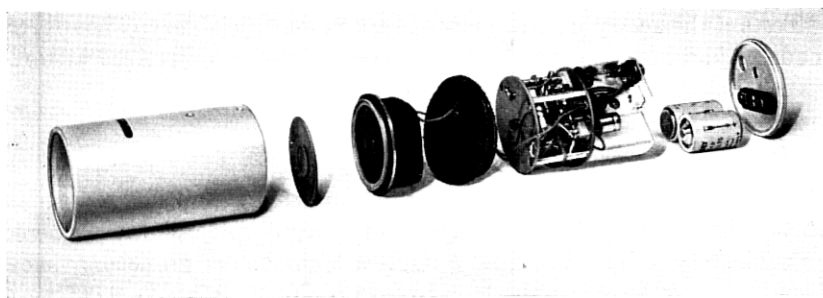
Exploded view of artificial larynx, showing modular construction.
